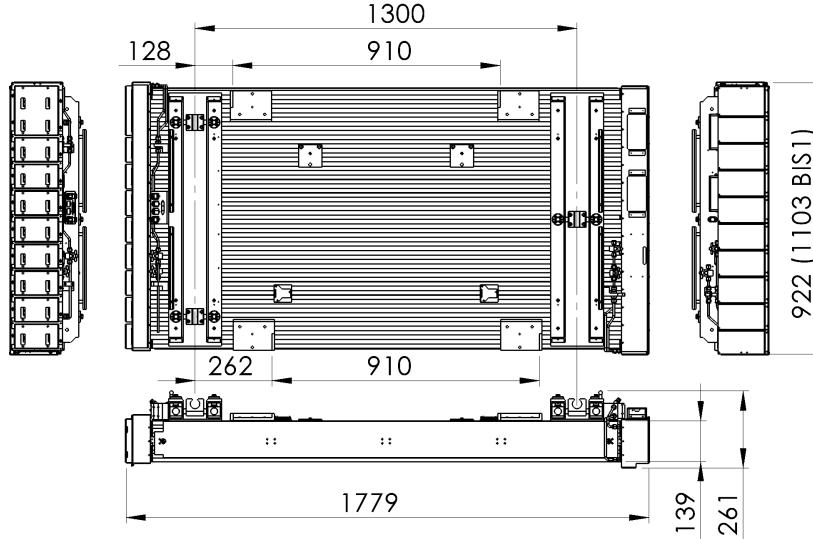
Drawing of a BIS2 sMDT chamber. Quoted dimensions are in mm.
